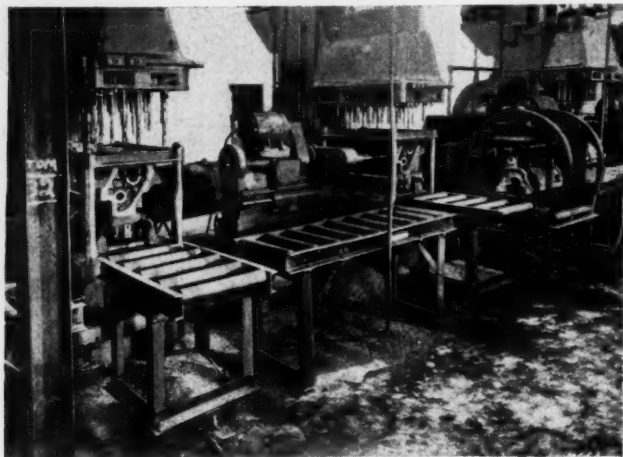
Conveyor section mounted on a ball-bearing turntable. At the right is a "roll-over" device, for turning blocks upside down without injury to the blocks, the conveyor, or the operator.
